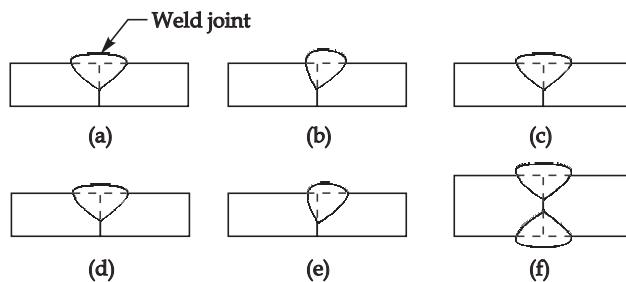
Some typical groove welds (a) square groove weld, one side; (b) single bevel groove weld; (c) single V-groove weld; (d) single U-groove weld; (e) single J-groove weld; (f) double V-groove weld for thicker sections.
